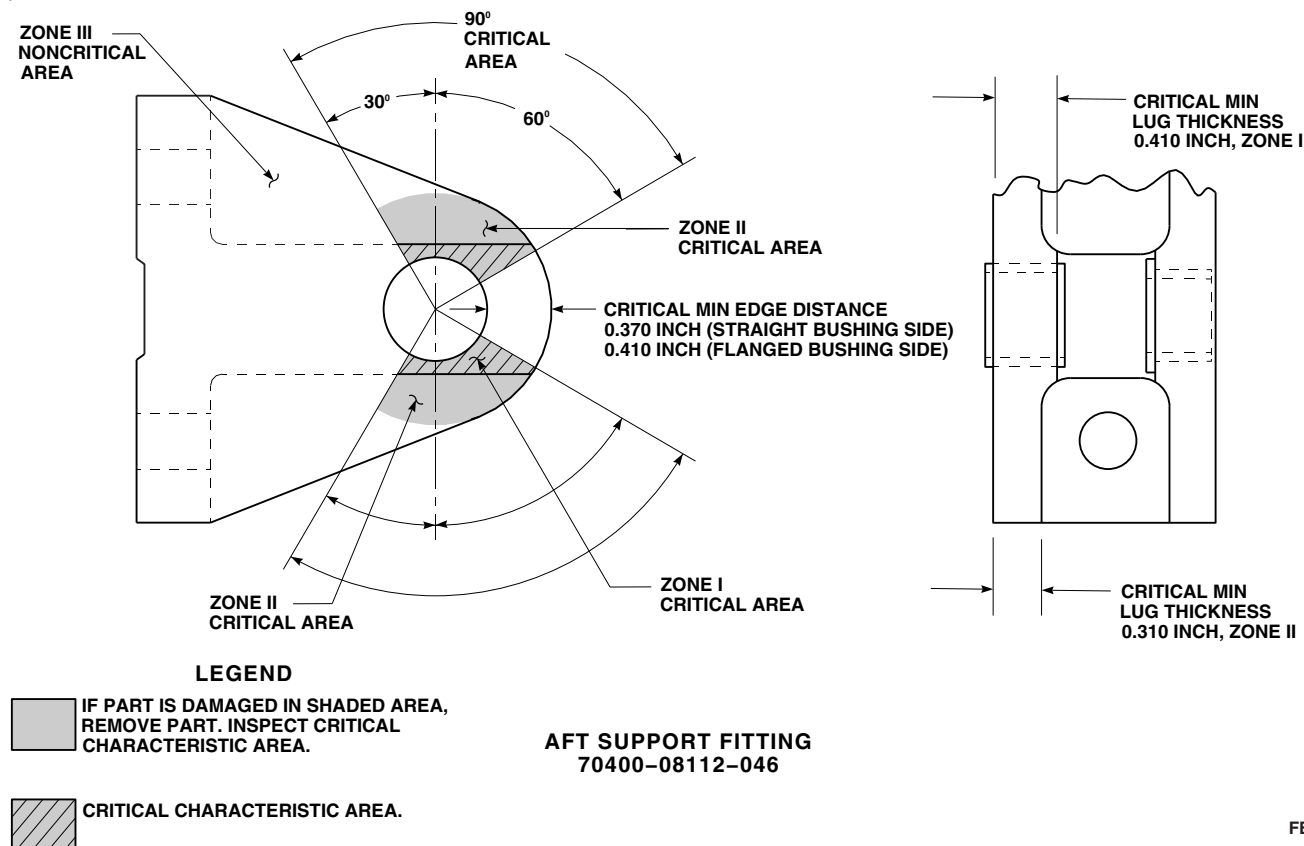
INSPECT AFT TIE ROD AND SUPPORT FITTING (SHEET 2 OF 3)
